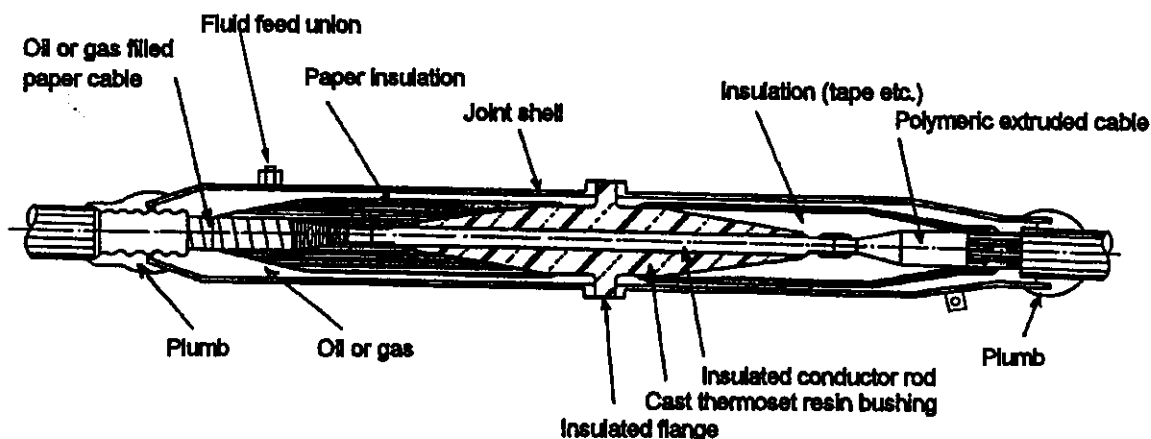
'Polymeric extruded cable to oil or gas filled paper cable' transition joint, single core, 'non-fed' type
